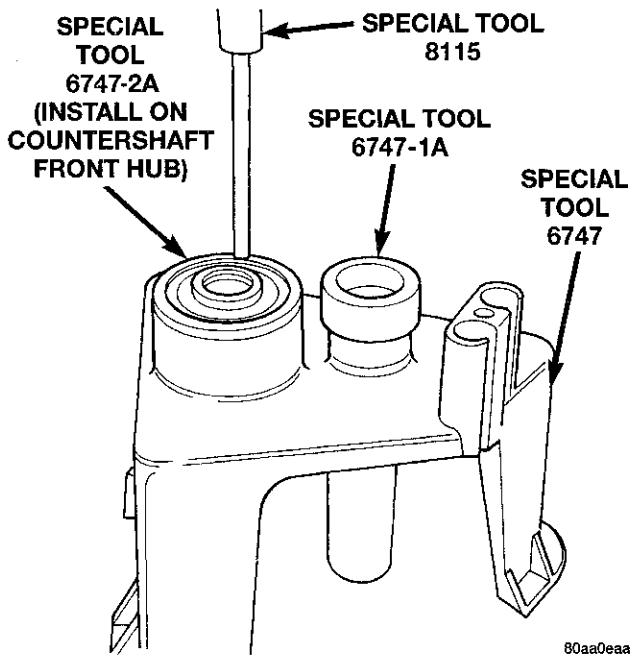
Preparing Assembly Fixture For Geartrain Build-up
